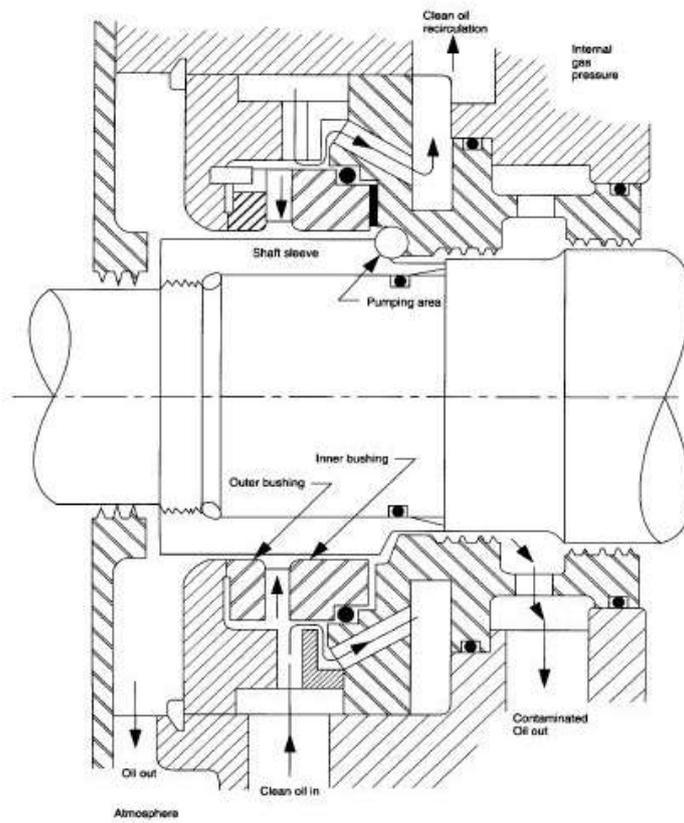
Liquid-Film Shaft Seal with Pumping Bushing
